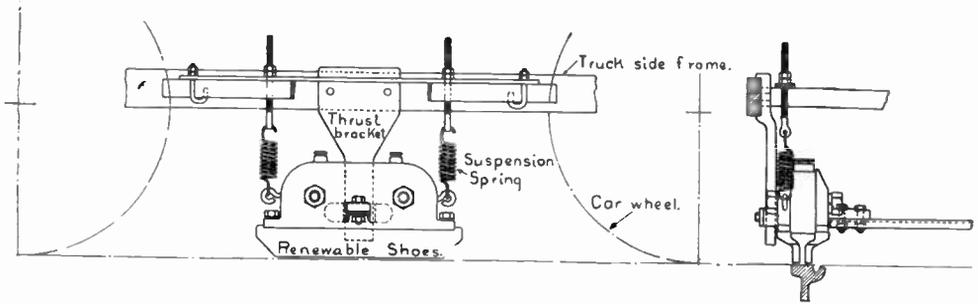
A.—How the ELECTRO-MAGNET IS MOUNTED.
